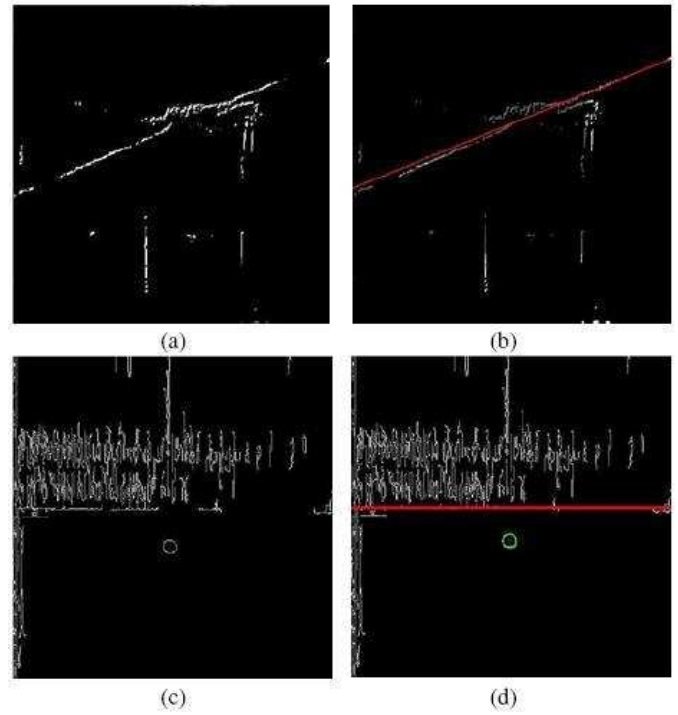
Line and circle detection by using Hough Transform to classify: (a)-(b) Welding and (c)-(d) clamp with identification hole.
